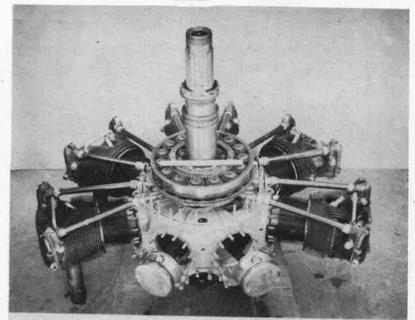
Front Power Section of Twin Bank 29038 Radial Engine Showing Reduction on Gear and Propeller Shaft (65%-2363).
